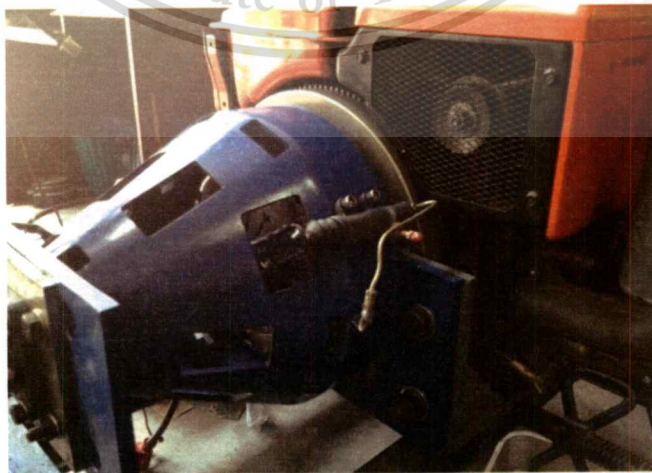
Assembled Direct clutch system prototype for one-cylinder diesel engine
